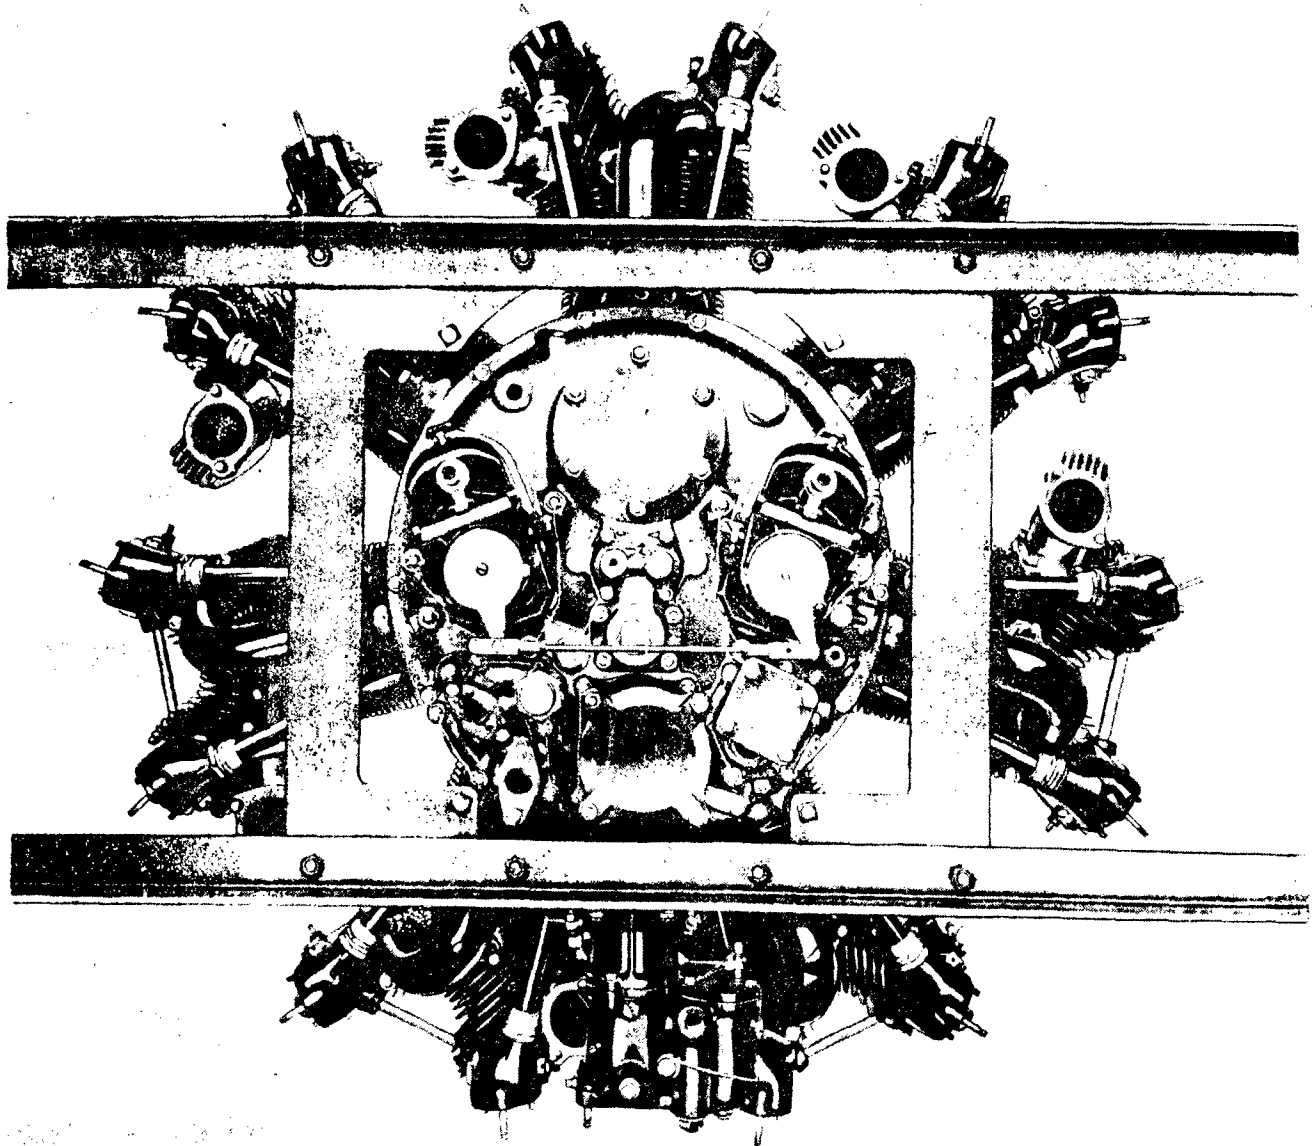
Rear View of Engine Mounted in Preparation for Disassembly
